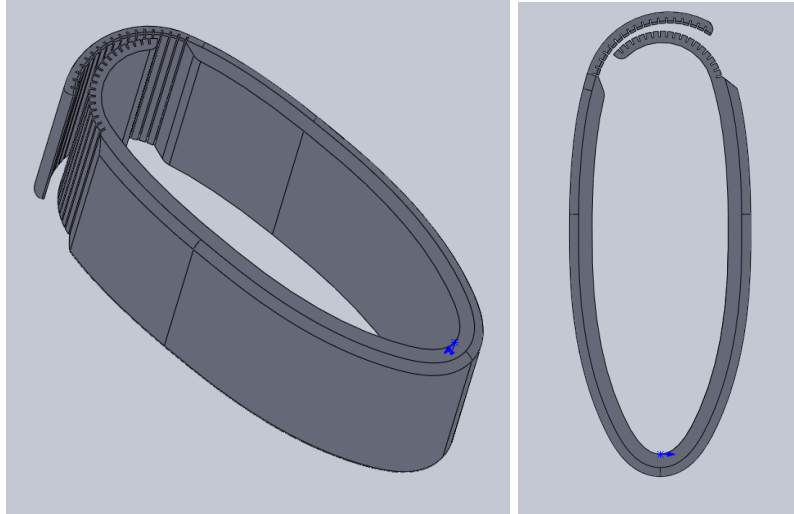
Solidworks CAD model of bioinspired band: isometric and top view
